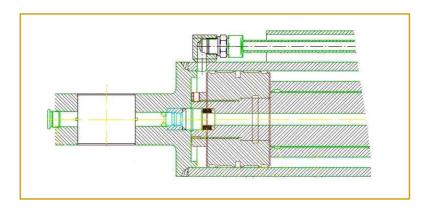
Sump slide hydraulic cylinder at both sides of the machine.
